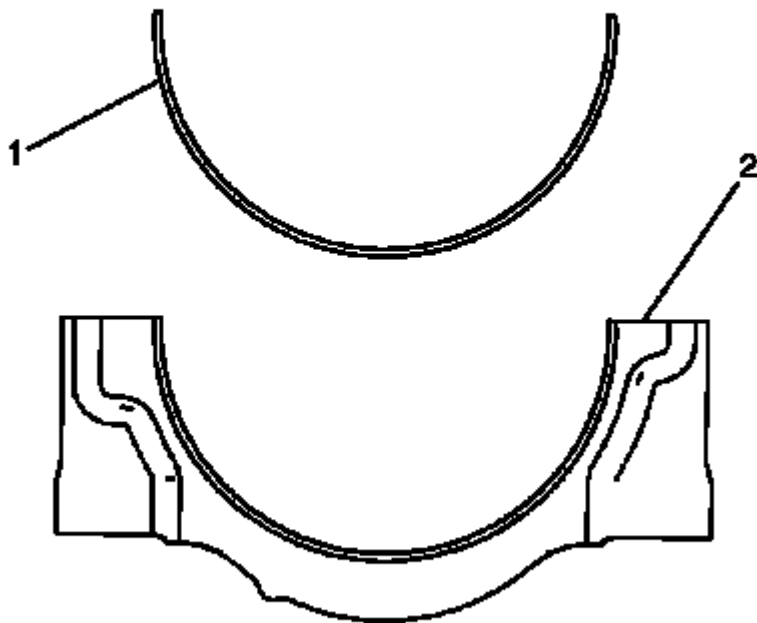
Identifying Lower Connecting Rod Bearings & Connecting Rod Cap
